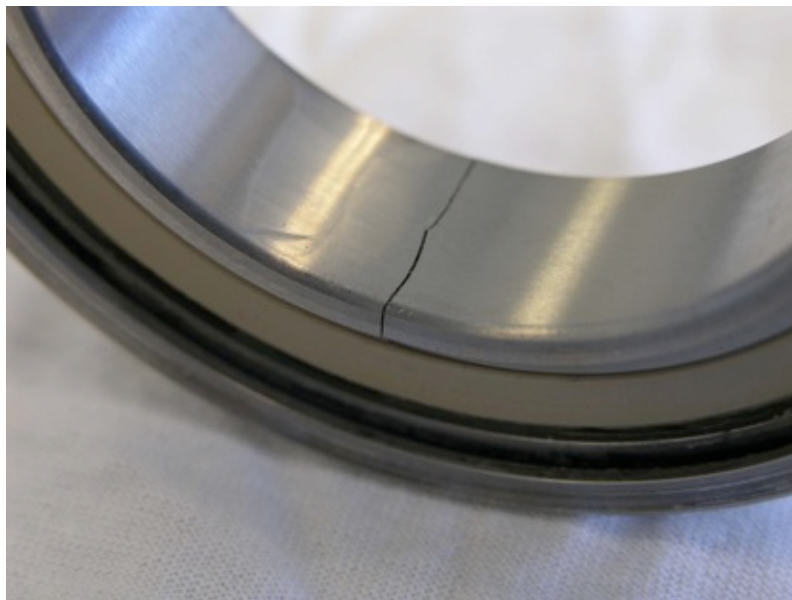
Photo of an early prototype bearing that developed an inner race crack during post-test storage
